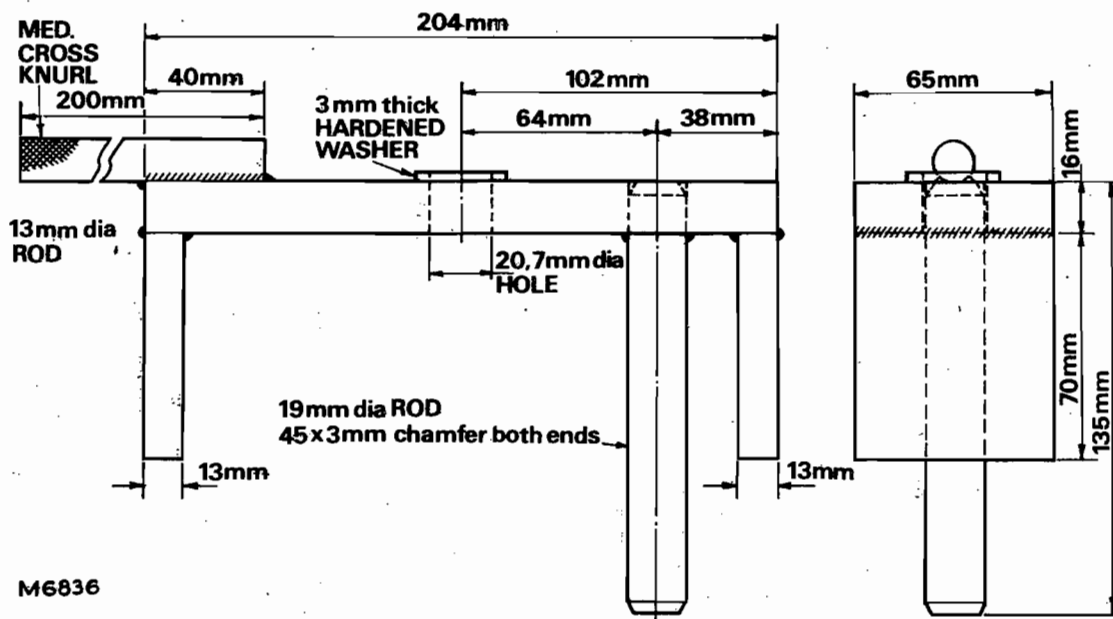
CAV ALTERNATOR ROTOR EXTRACTOR
